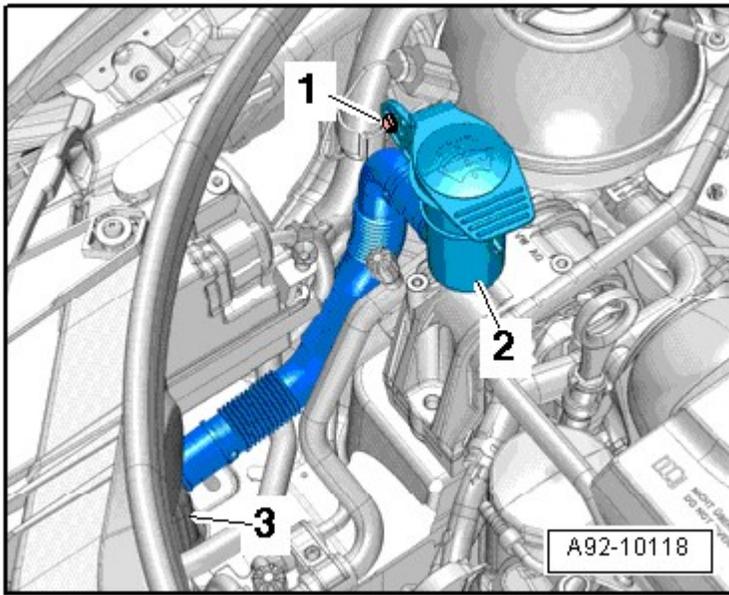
Identifying Windshield Wiper Fluid Reservoir Filler Tube -2- And Bolt
